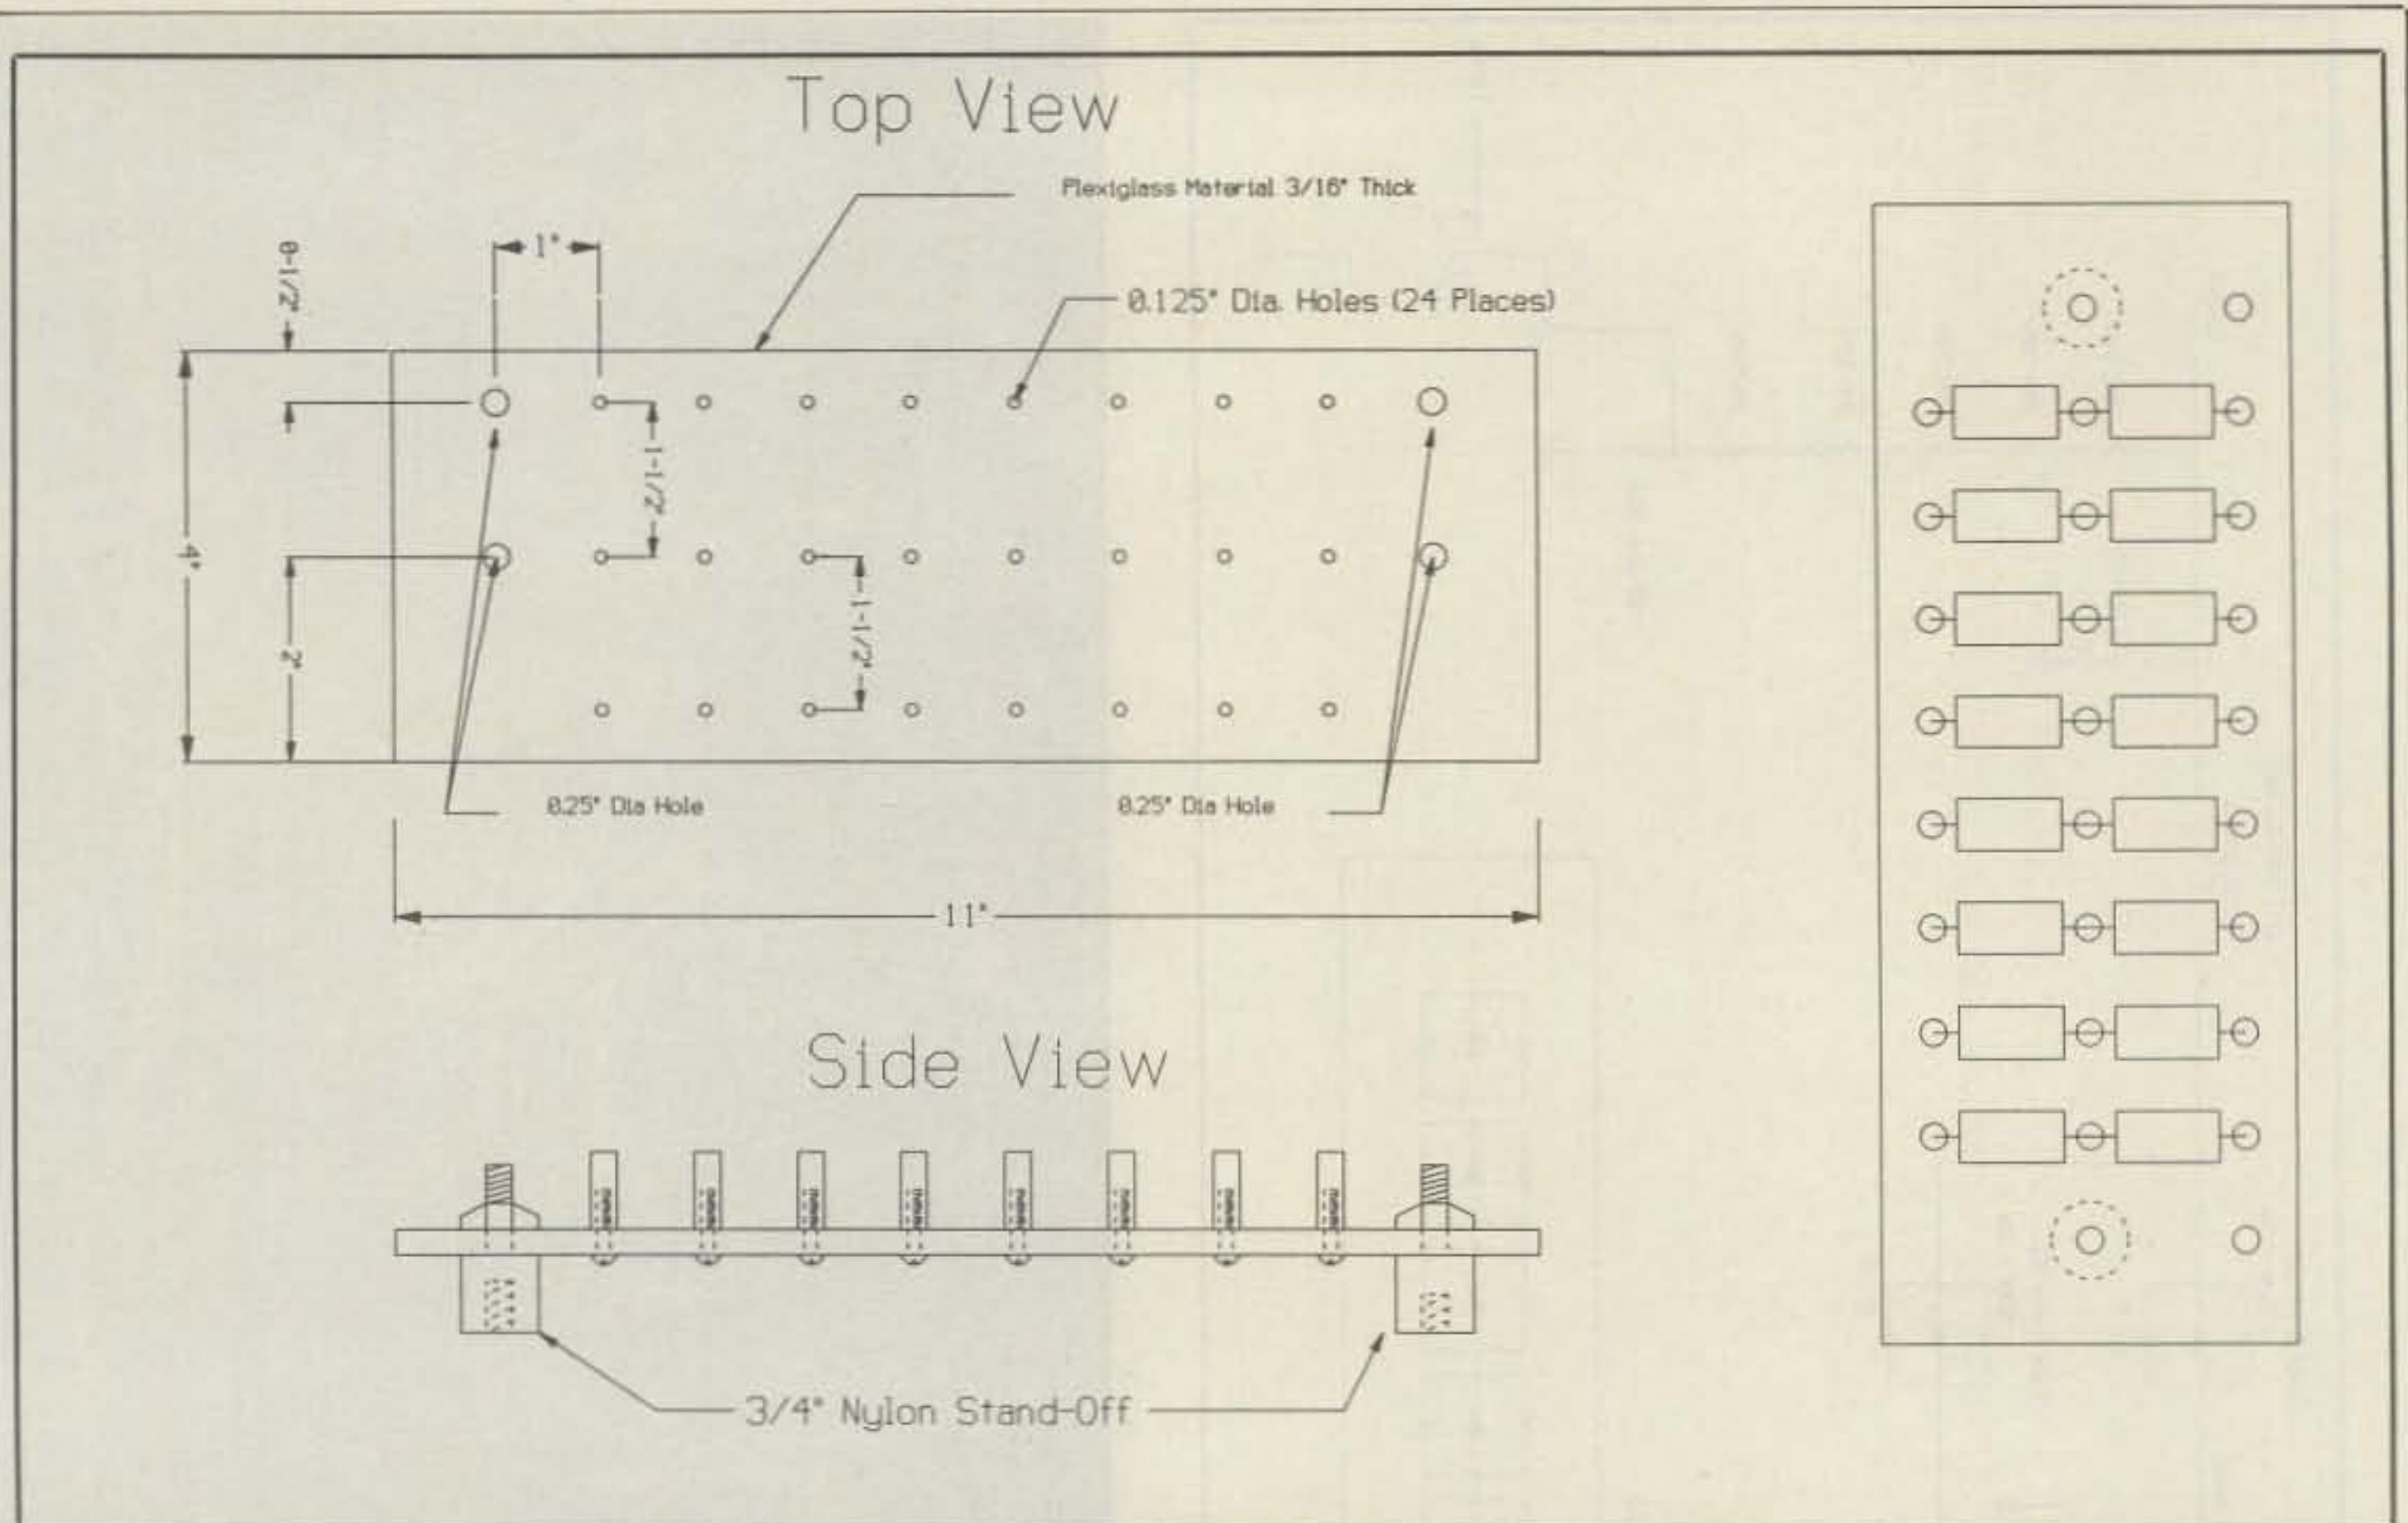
Mechanical diagram for the diode stacks showing parts placement. There are two stacks.
